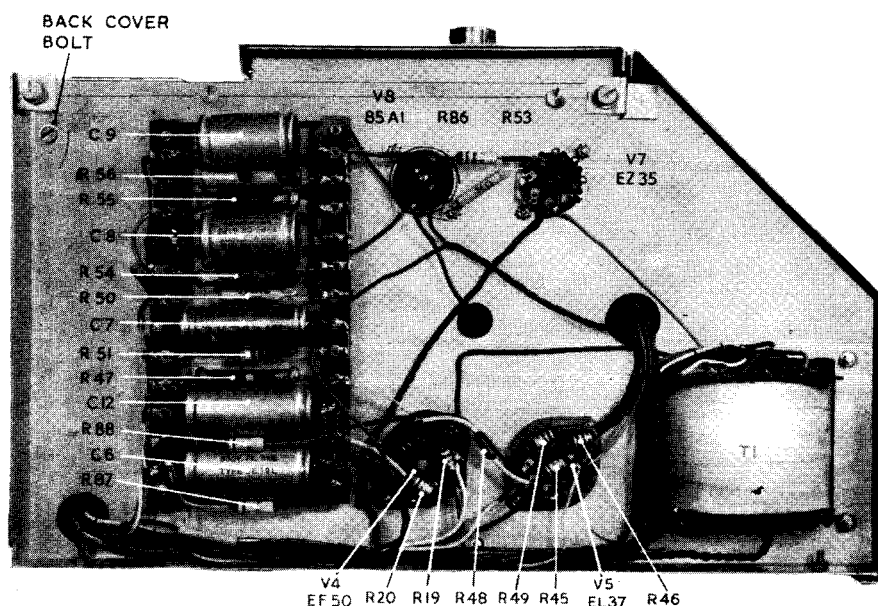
LEFT-HAND SIDE OF CHASSIS SHOWING NUMBERED COMPONENTS.
